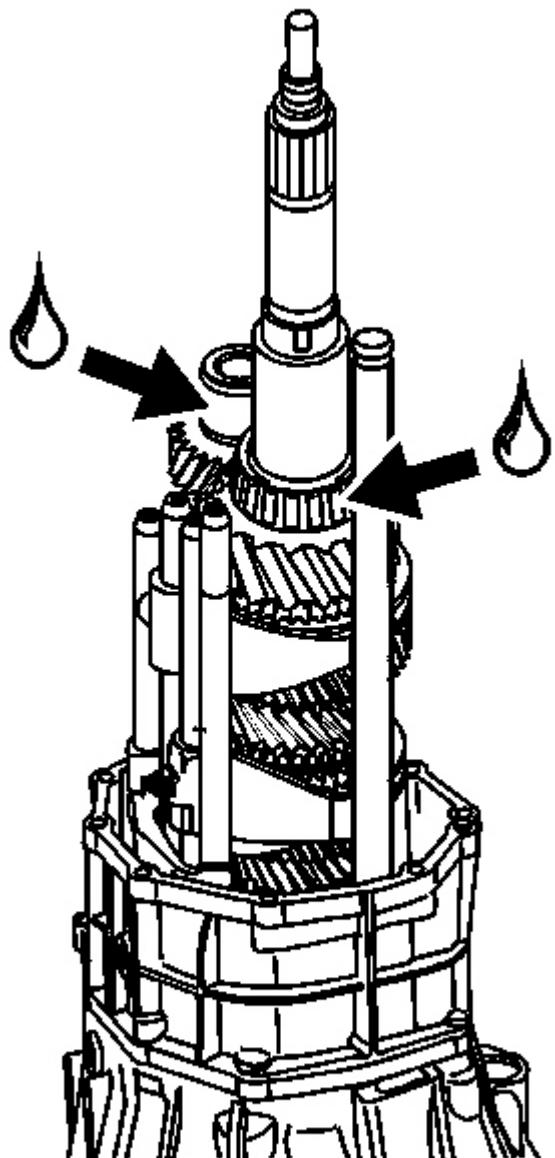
Applying Lubricant To Tapered Roller Bearing & Cylindrical Roller Bearing Inner Race
